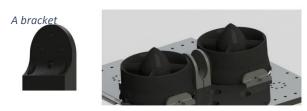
SolidWorks of thrusters fixed to the sheet with the 3D-printed brackets, by Rana.
